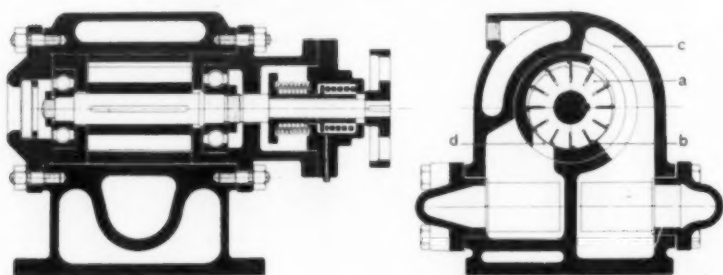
Longitudinal and cross-sections through a 102,000-B.t.u. machine. Key: a—rotor, b—adjustable liner, c—suction chamber, d—compression chamber.
